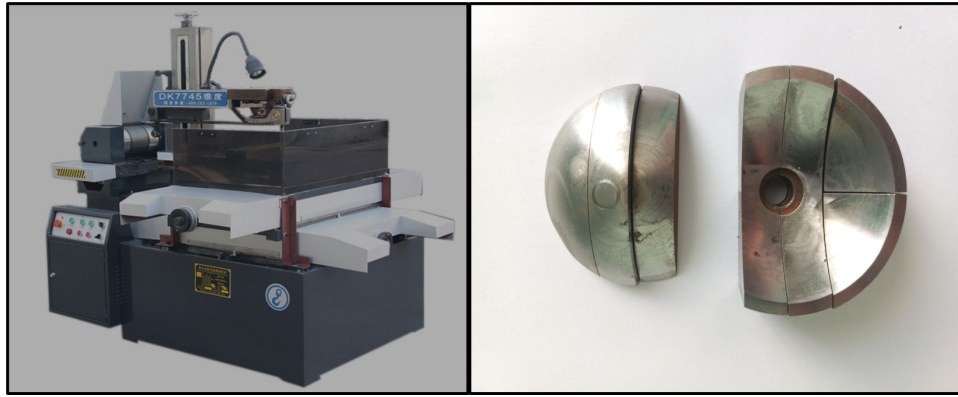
a) DK7745 electro-erosion machine, b) sectioned samples.
